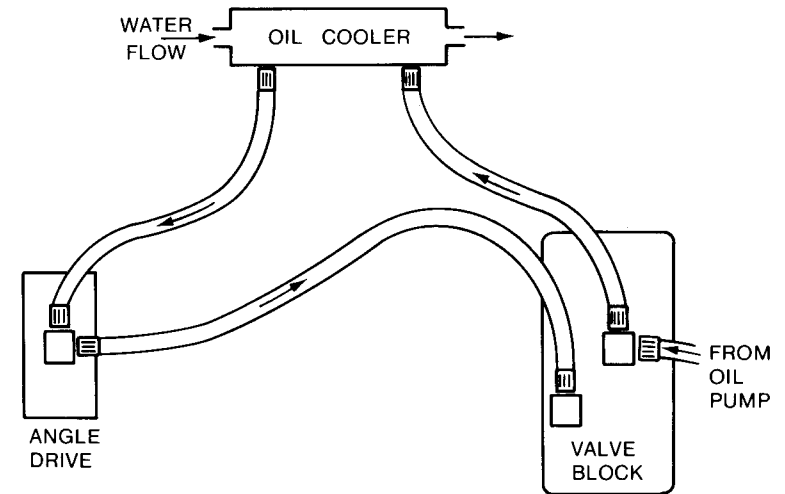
Oil Cooler Connections — PRM 601MA, with Angle Drive.
